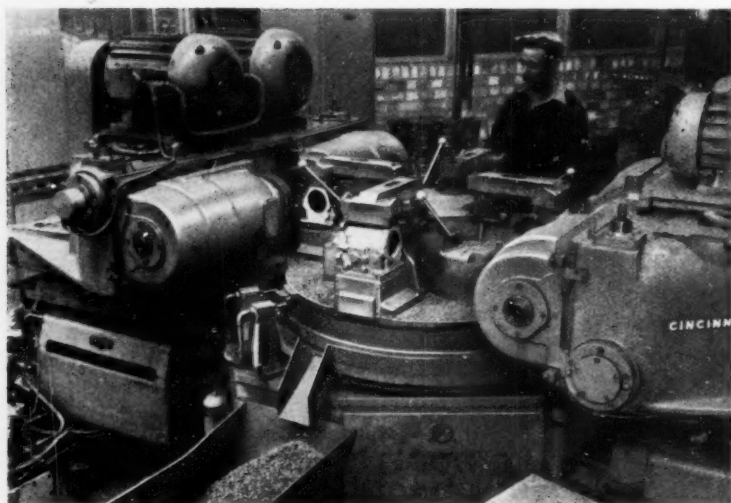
A Second Machine, of Somewhat Similar Construction to the Unit in Fig. 5, is Employed for Rough and Finish-milling the End Faces of the Gearbox Casting, and is Controlled by a Camshaft and Valve Mechanism Beneath the Cover at the Lower Left
